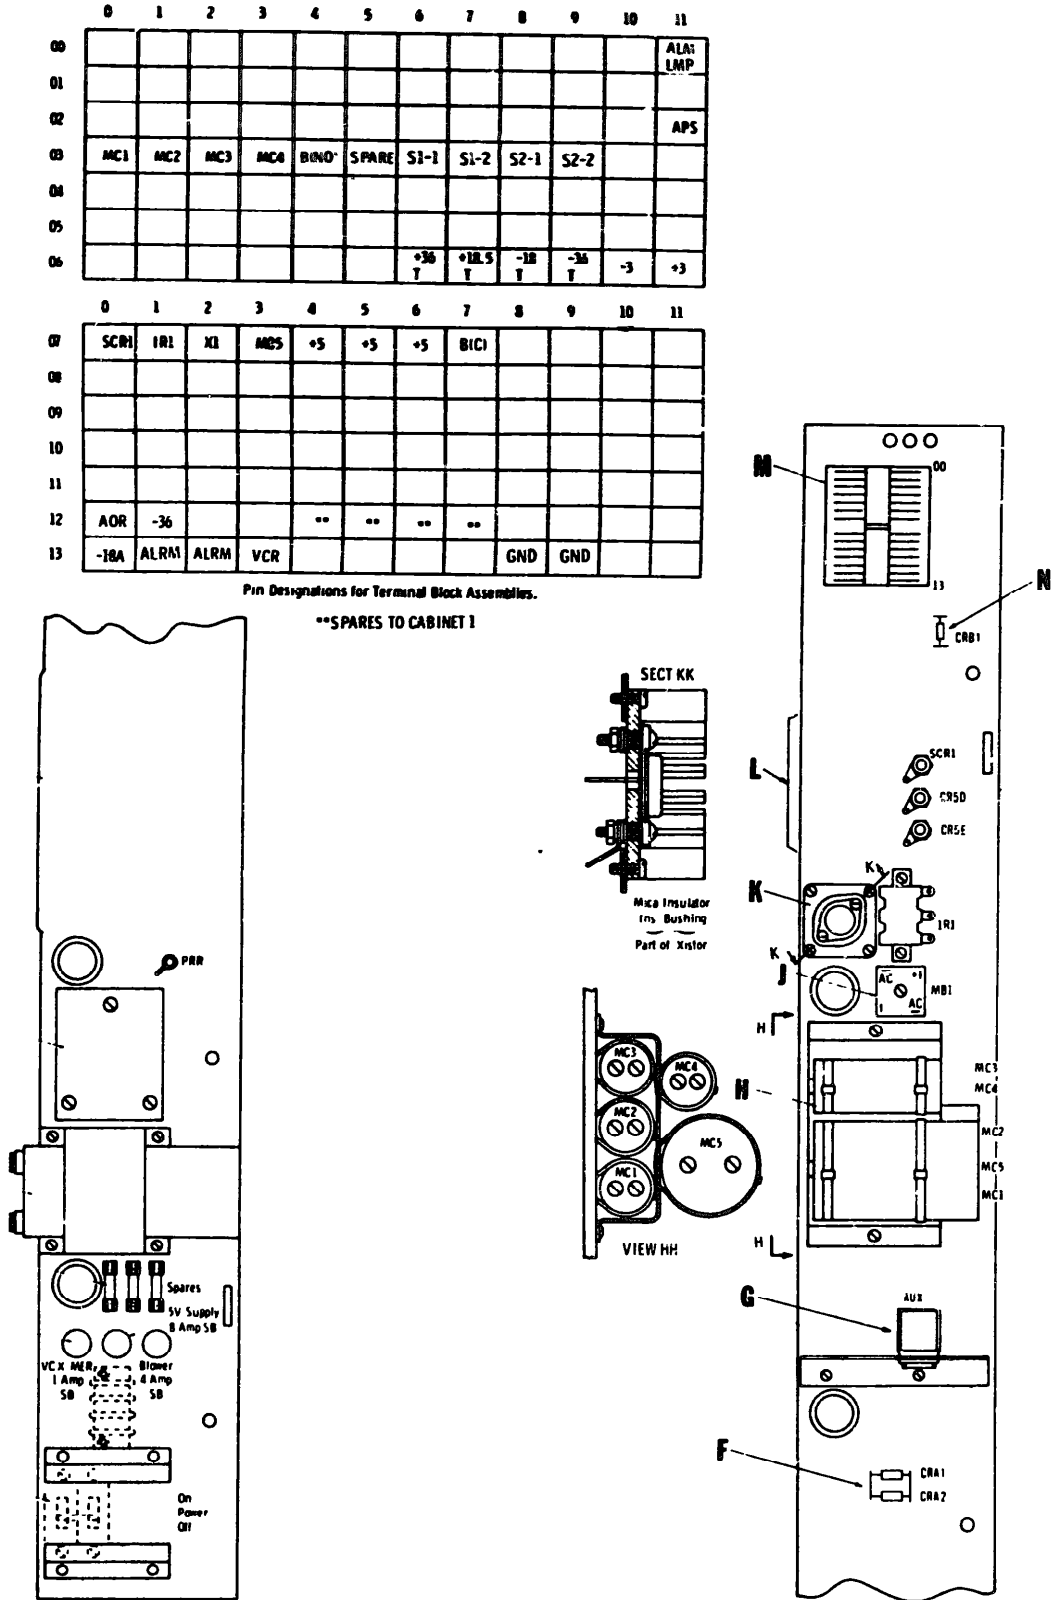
100-Line EPABX, No-Break Cabinet Miscellaneous Panel Assembly.
